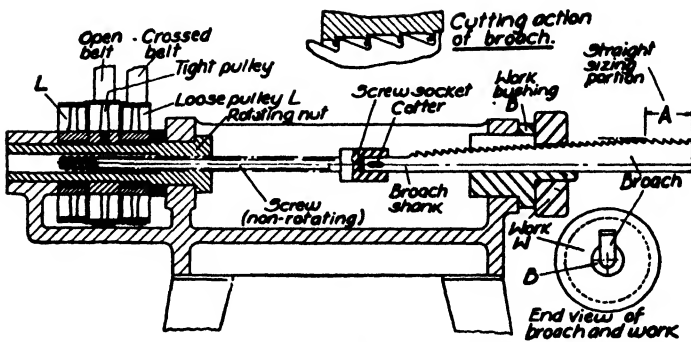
Horizontal Screw-actuated Broaching Machine.
